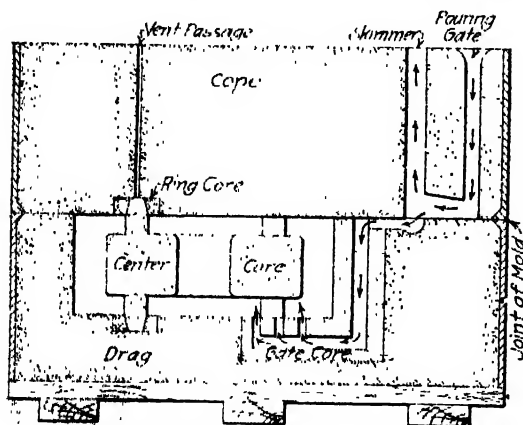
Cross Section of 12-In. Piston Mold on Standard Pattern Board
